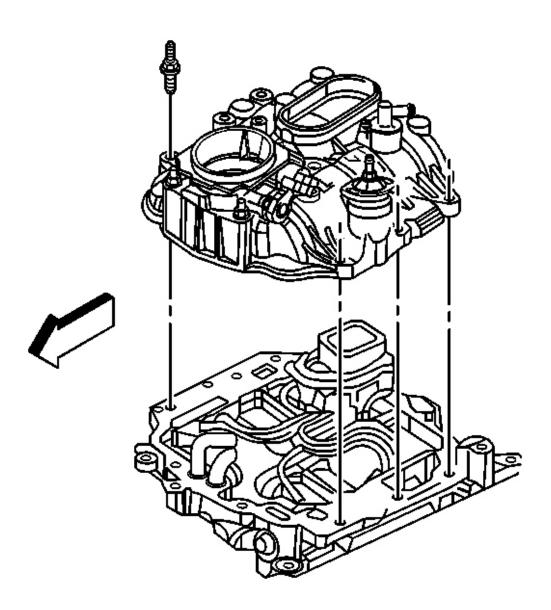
Upper Intake Manifold Courtesy of GENERAL MOTORS CORP.
